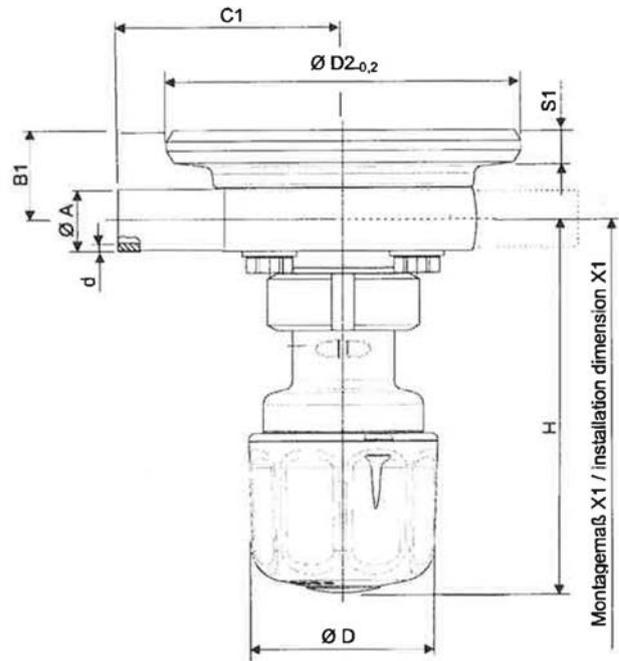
VESTA tank bottom valve H_A/T/F/H with housing for flanging
